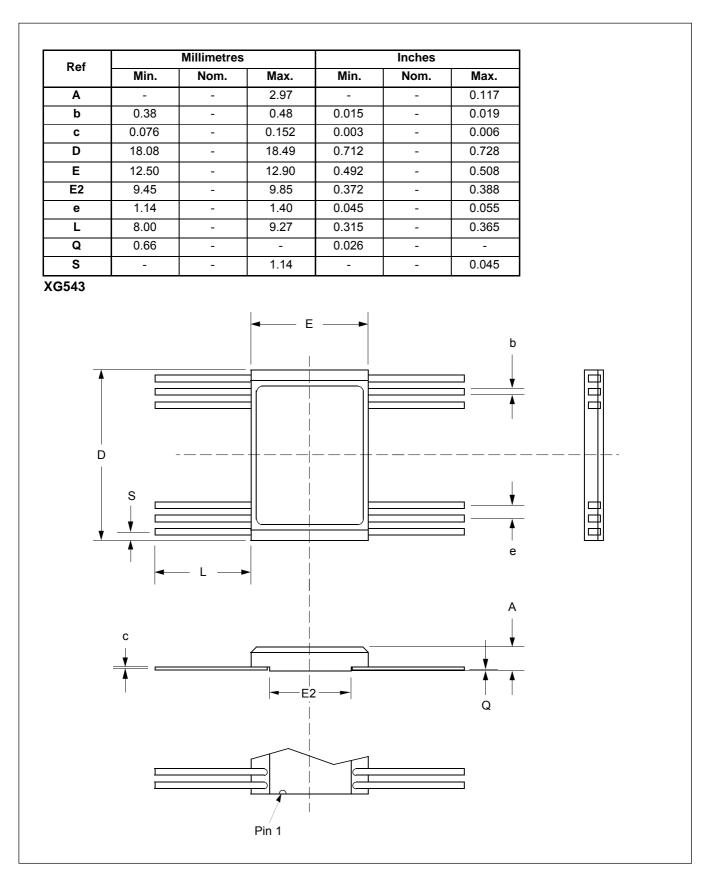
28-Lead Ceramic Flatpack (Solder Seal) - Package Style F
